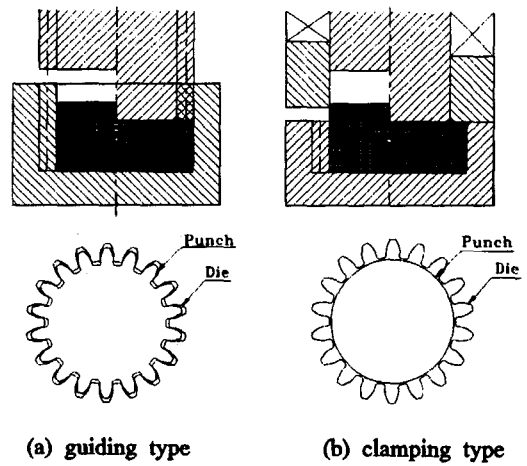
Die design schematics for the gear forging⁽⁵⁾
